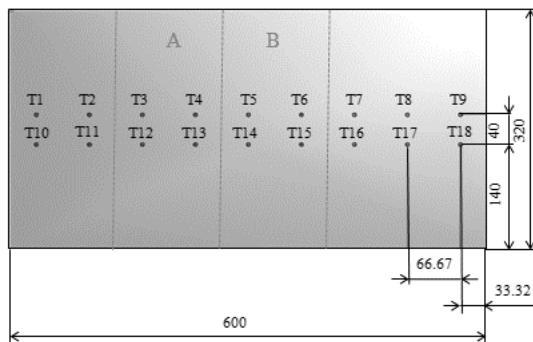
Dimensions of the test plate with positions of the thermocouples
